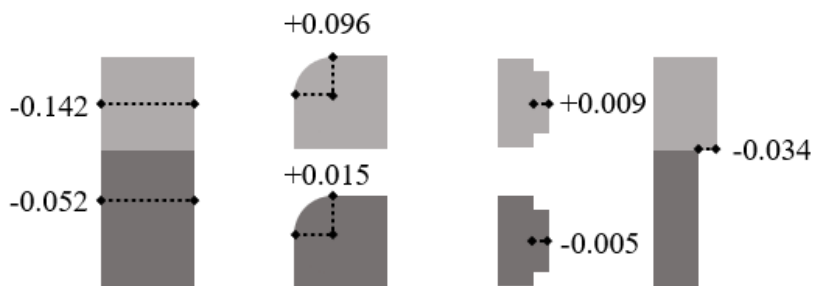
The deviation of the measured workpiece dimensions from the ideal workpiece dimensions given in millimeters. The negative sign signifies a dimension smaller than the ideal while a positive signifies opposite.
